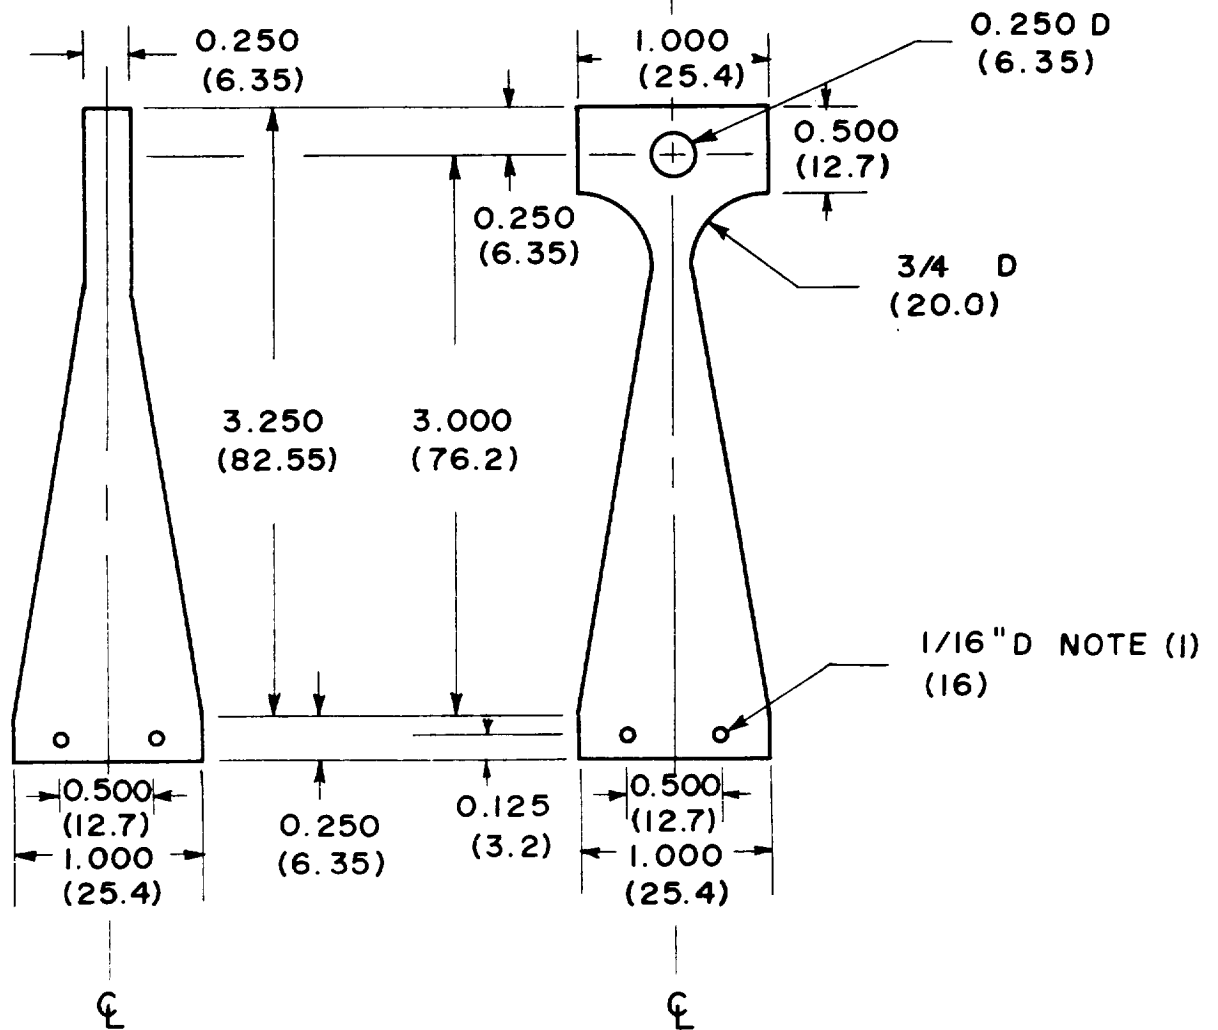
WTB specimen pre-adhesive blanks. Dimensions are inches (mm).
